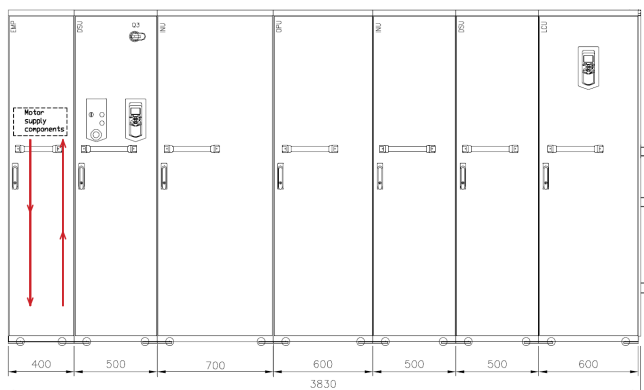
The dimensional drawing of the drive. Motor circuit is externally supplied, red arrows indicate the incoming and outgoing cables
